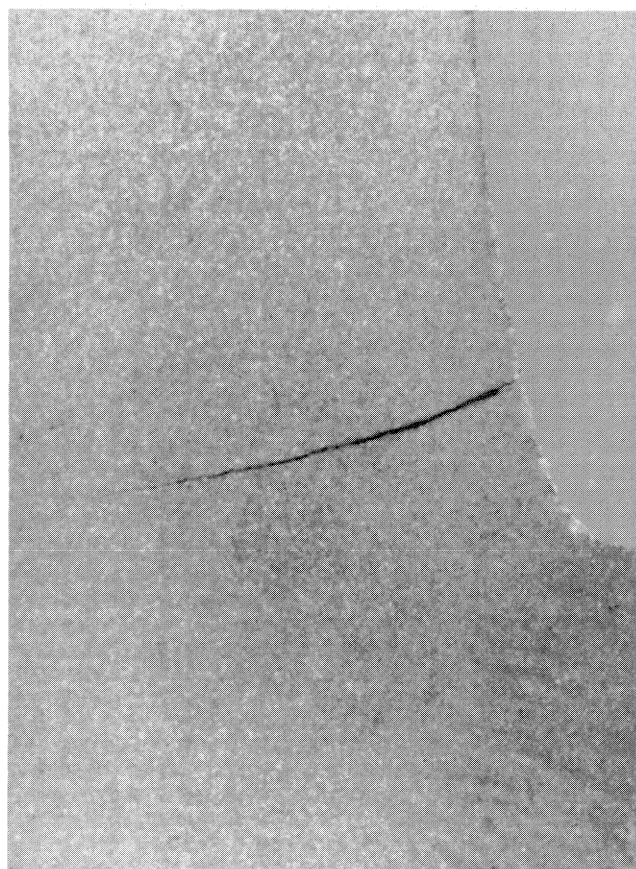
Fatigue Crack in Erosion-Thinned Turbine Blade.
